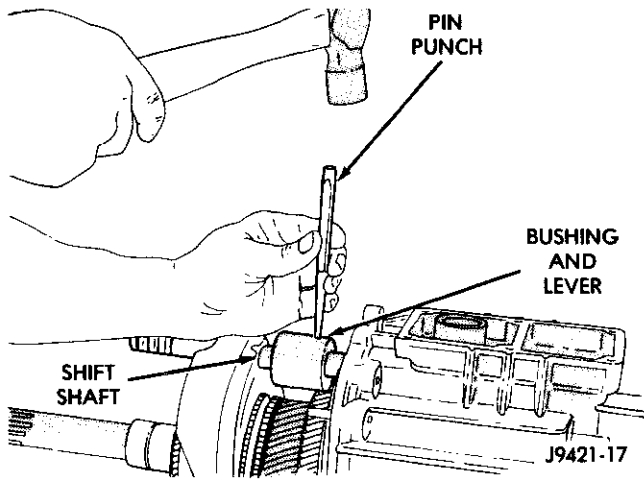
Removing Shift Shaft Lever And Bushing Roll Pin
